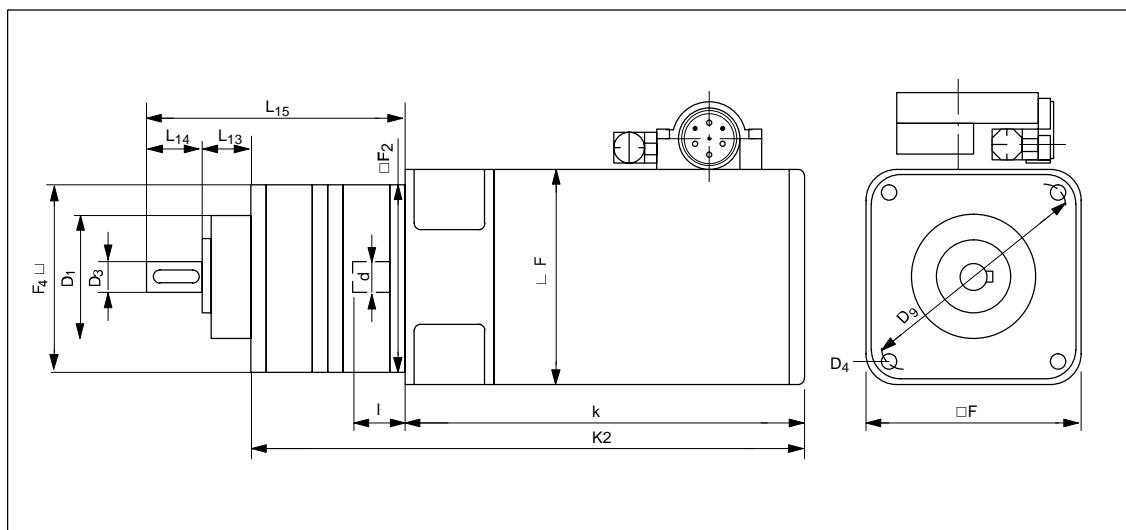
1FT5 series with 2-stage planetary gearbox (alpha company), dimensions, refer to Table 3-9
